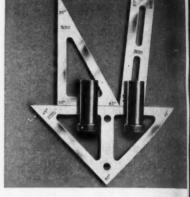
Taft-Peirce Angle Gages Arrangel is Produce a 36-Deg. Angle.
